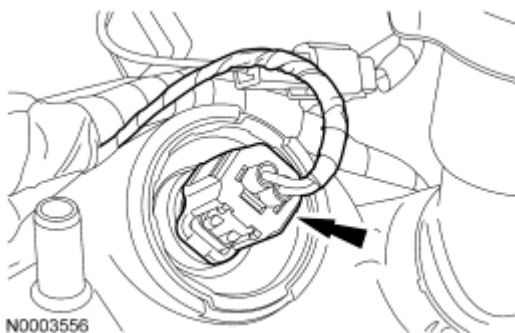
Locating Camshaft Timing (VCT) Solenoid Electrical Connectors
